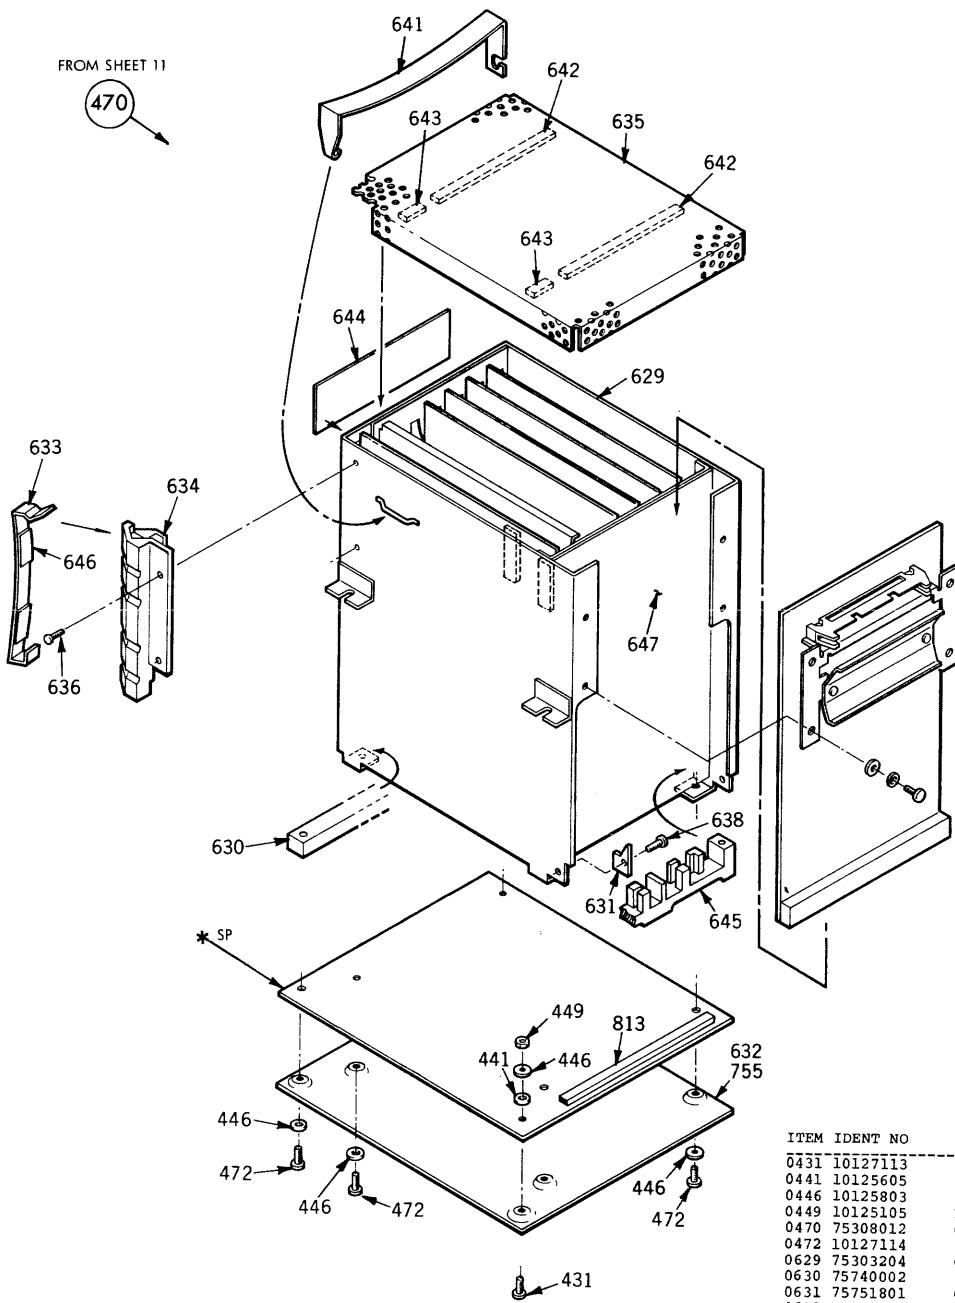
COMMON PARTS (SHEET 3 OF 3)
